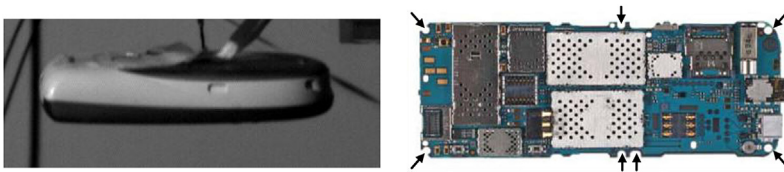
Horizontal impact of a PED and the attached sites of PCB assembly to the device housing.
